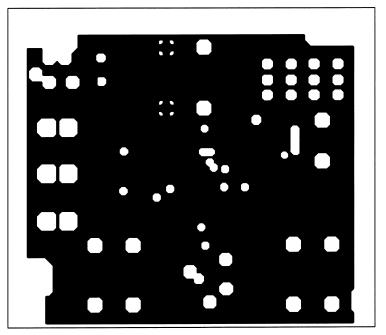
Recommended LQ PC Board Layout: Component-Side Layout
